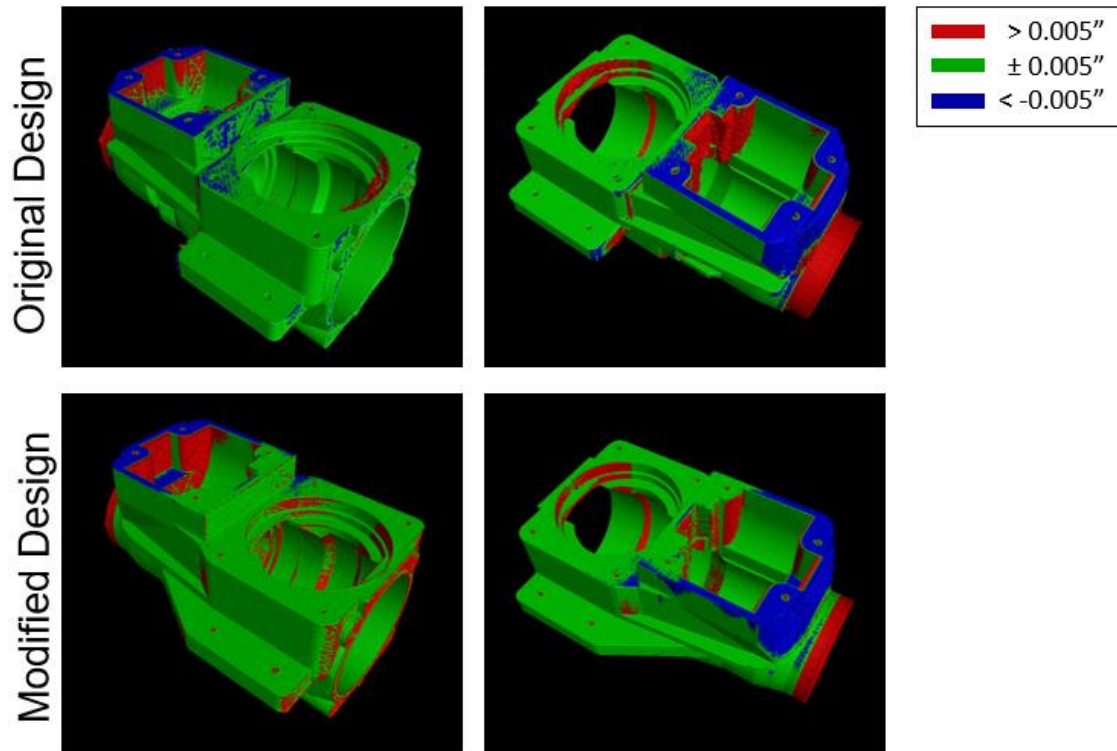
Nominal actual dimensional analysis of AM parts vs. CAD files for original and modified crankcase designs
